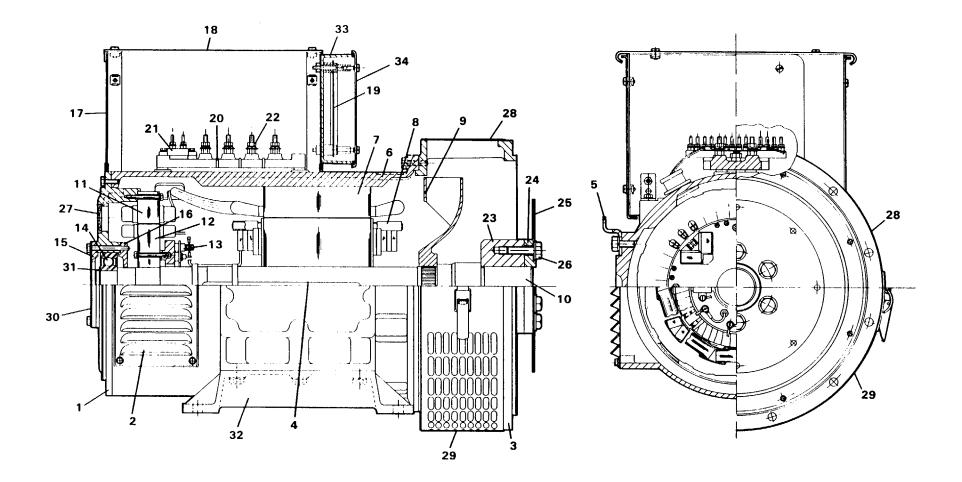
SC1 - 2 SINGLE BEARING MACHINE (INBOARD EXCITER)
